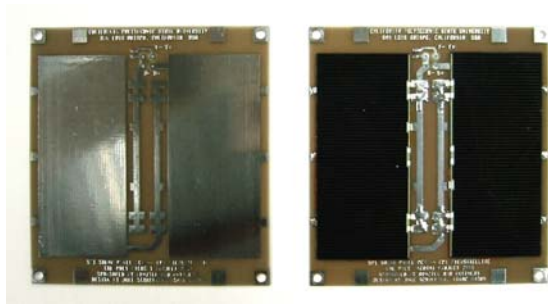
Solar Panel PCB (left), Assembled Solar Panel (right)
